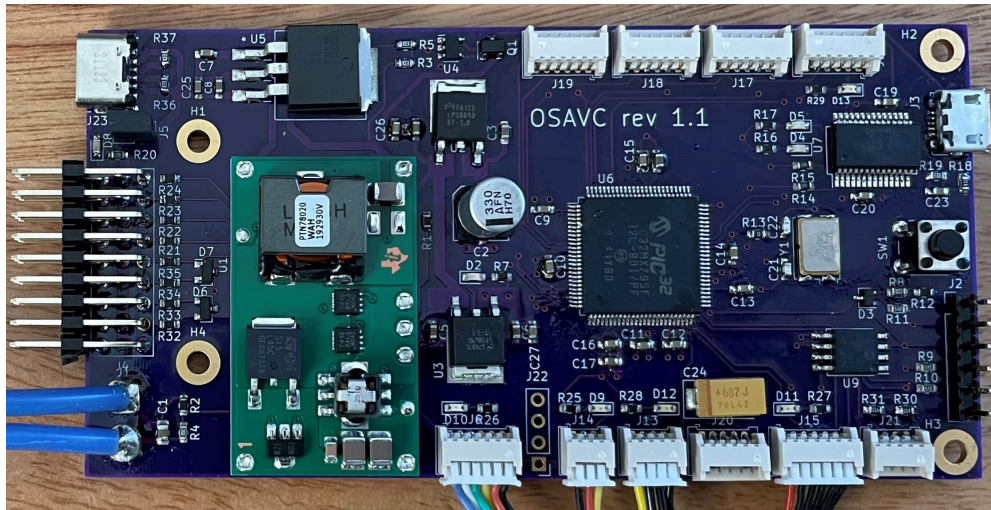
The completed PCB assembly. This prototype is hand-soldered. It is easy to see that the solder has flowed underneath the three LDOs.
